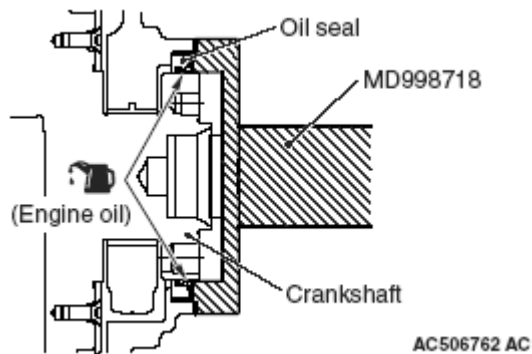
Applying Engine Oil To Inner Diameter Of Oil Seal Lip
